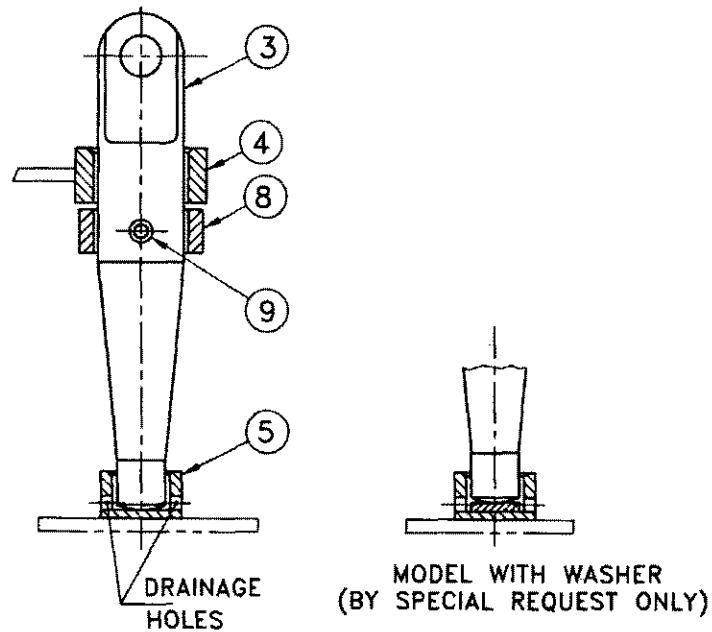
ILLUSTRATION OF TYPE C ASSEMBLY
